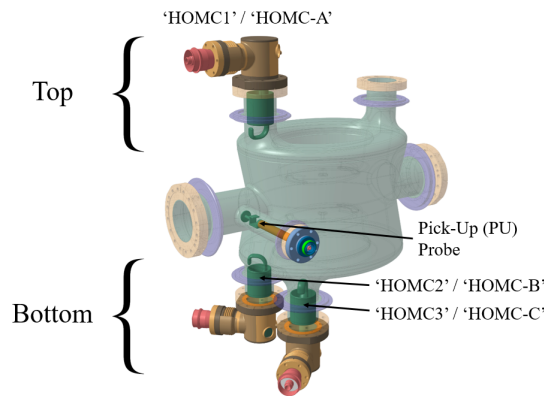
DQW crab cavity dressed with HOM couplers and pick-up probe.
